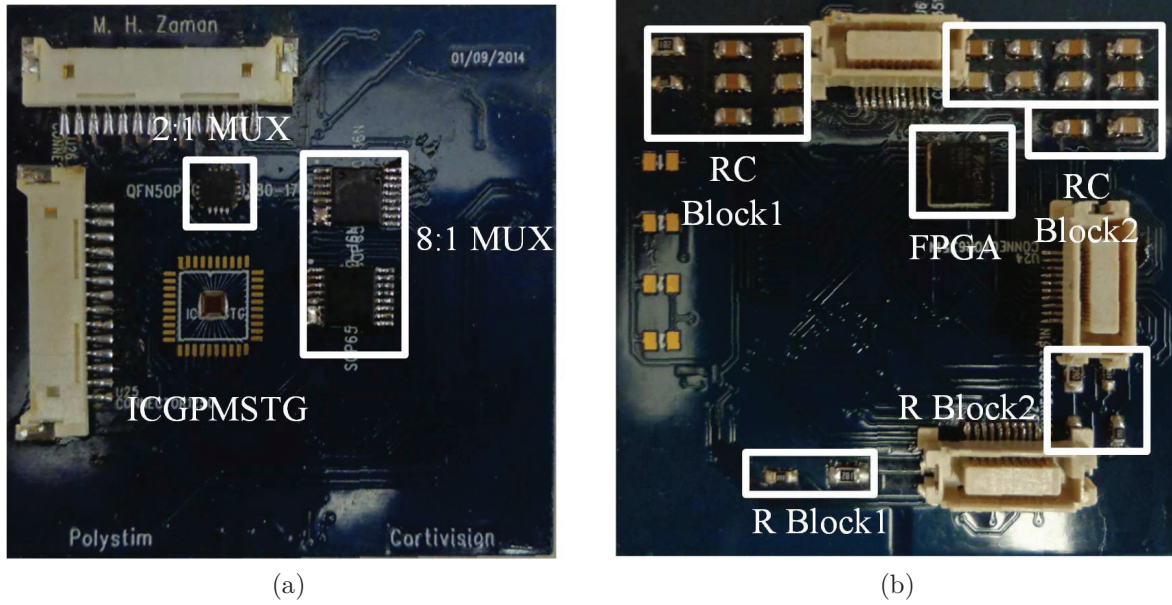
The assembled microstimulator prototype: (a) Top view of PCB1 containing the wire-bonded stimuli-generator chip die, 2:1 and 8:1 MUXs and connectors; (b) the assembled FPGA chip, the associated resistors and capacitor, and connector on the bottom side of PCB1.
